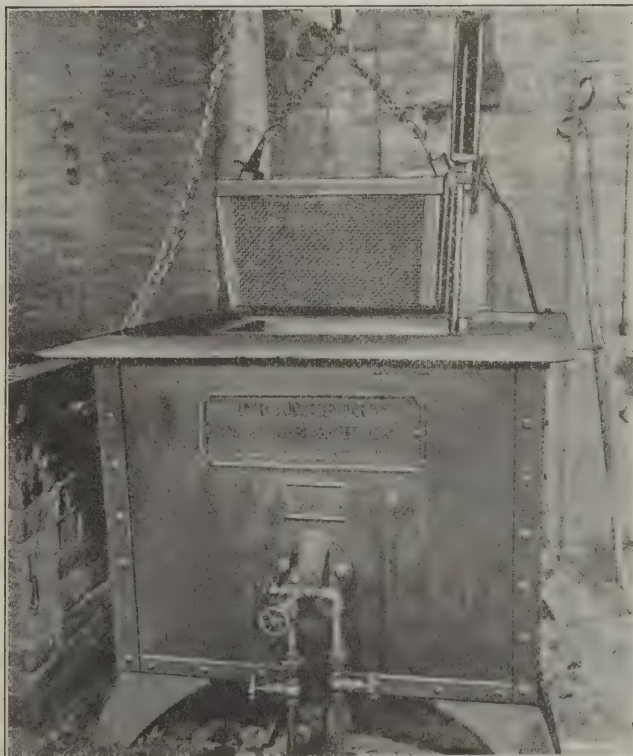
Oil Bath for Drawing the Temper after Hardening
